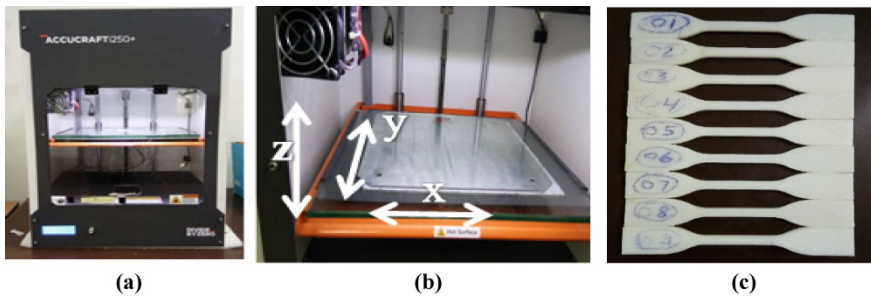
a outside view of AccuraCraft250 + 3D Printer. b Inside view AccuraCraft250 + 3D Printer Chamber. c Printed specimens
